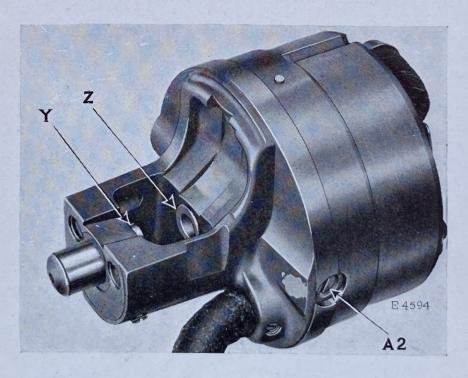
View of Motor, Showing Clearance Between Bearings for Spiral Driving Pinion
